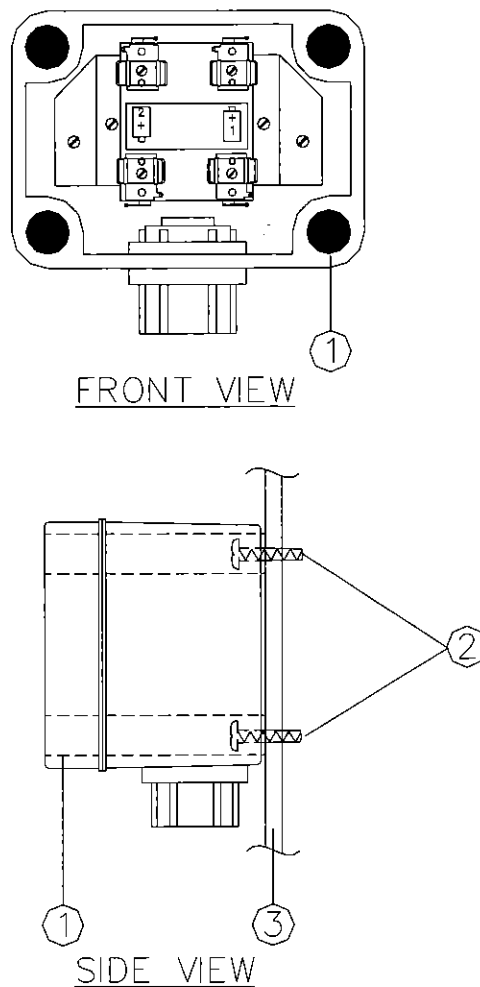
Mounting the Enclosure to a Wall (enclosure cover not shown)
